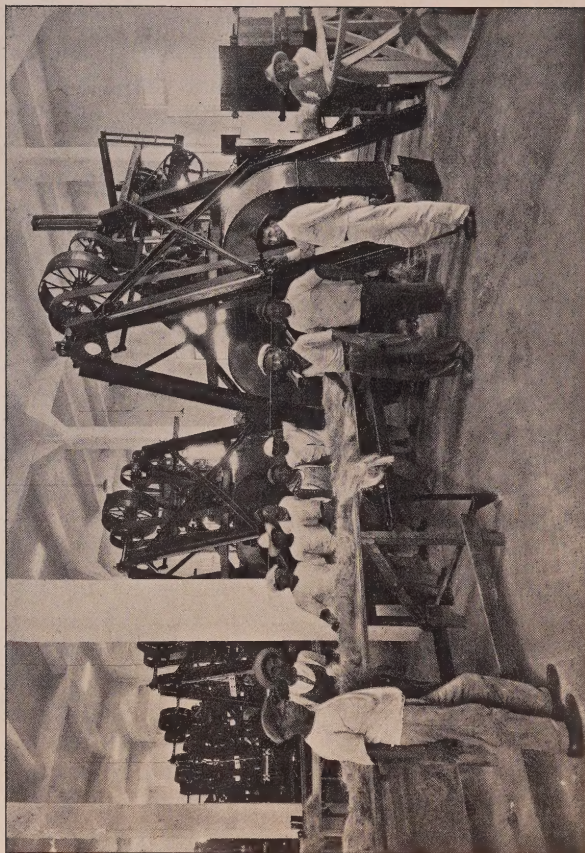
A Robey hand-brushing machine, 42-inch by 72-inch.
